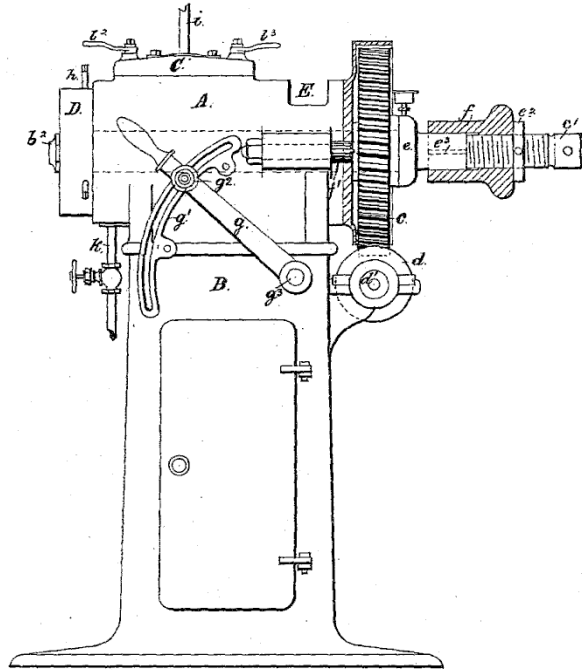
Drawing of John and Vernon Royle's single screw extruder [28].
